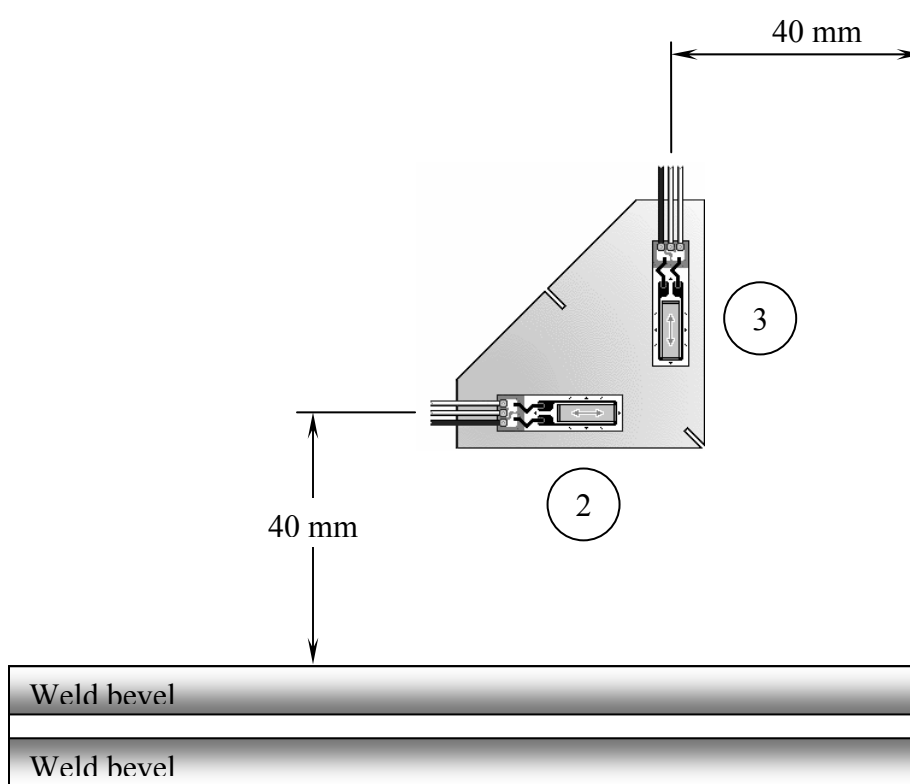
Sketch Showing Layout of Gauges 2 and 3 on the Sleeve
